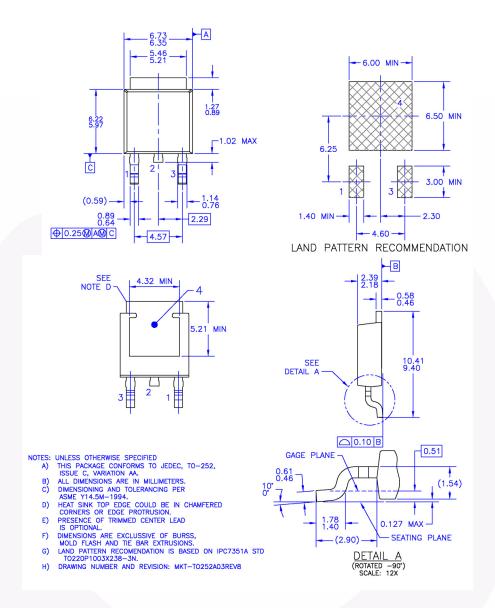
TO-252 3L (DPAK) - TO252 (D-PAK), MOLDED, 3 LEAD, OPTION AA&AB
